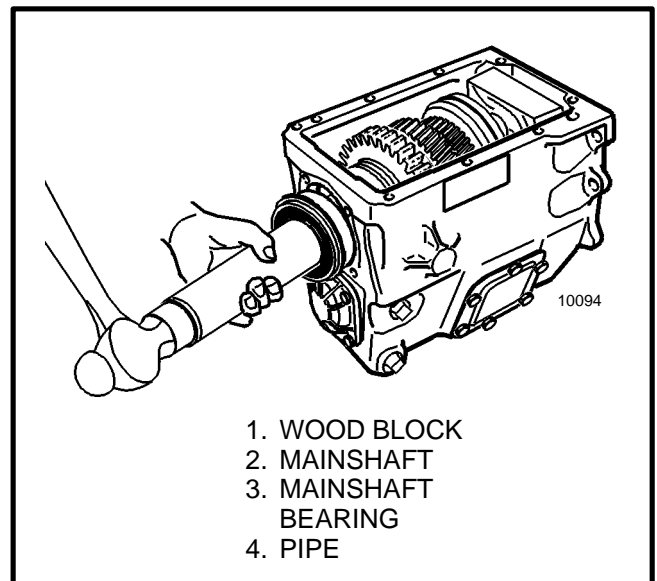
INSTALLING THE MAINSHAFT BEARING
